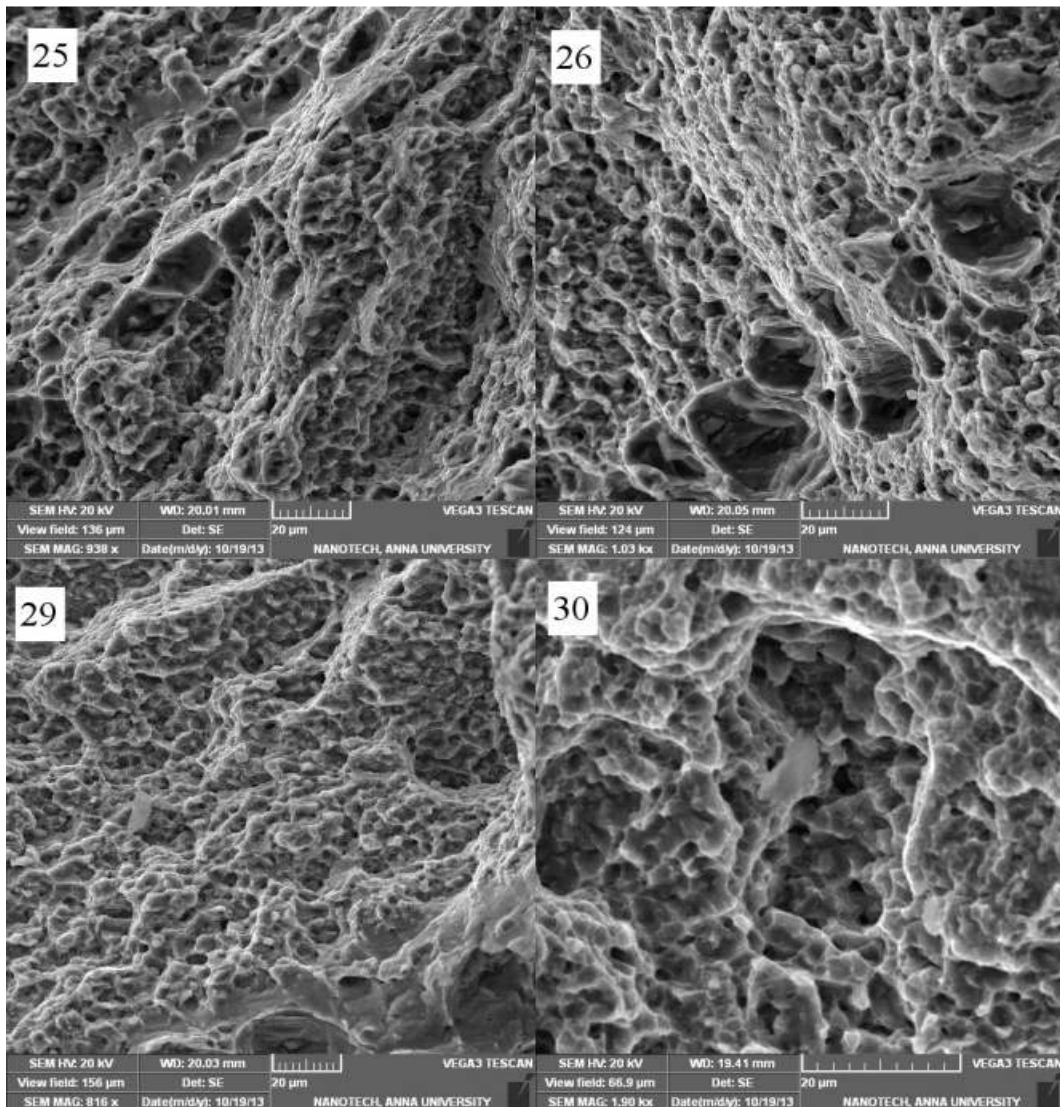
Fracture SEM zone of 25, 26, 29 and 30th run samples
